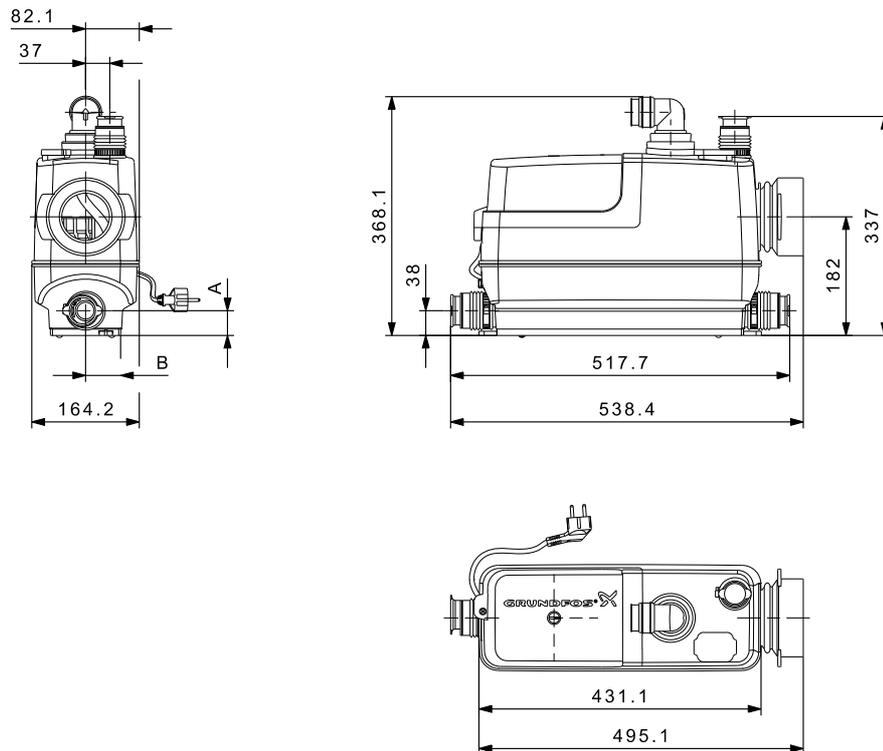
Dimensional drawings, Sololift2 CWC-3
